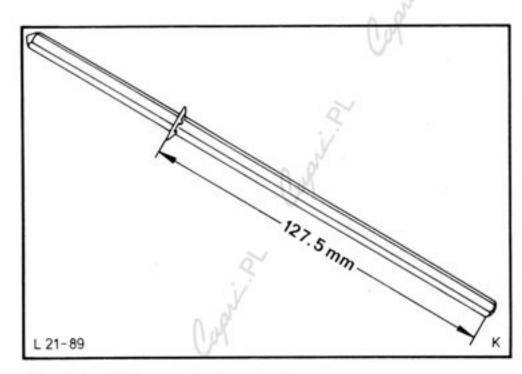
Oil pump drive shaft. (127,5 mm = 5,02 in.)
